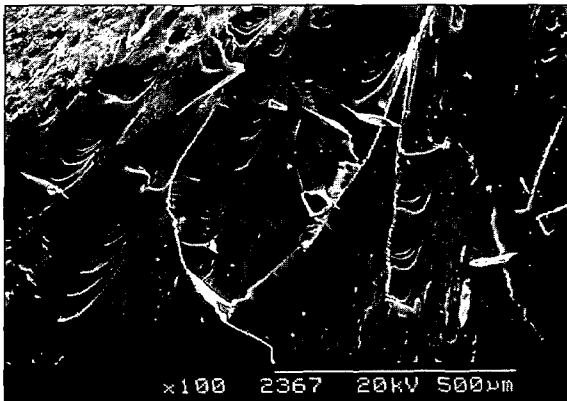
Fracture surface of Group 1 specimen, No filler. $\times 100$.
